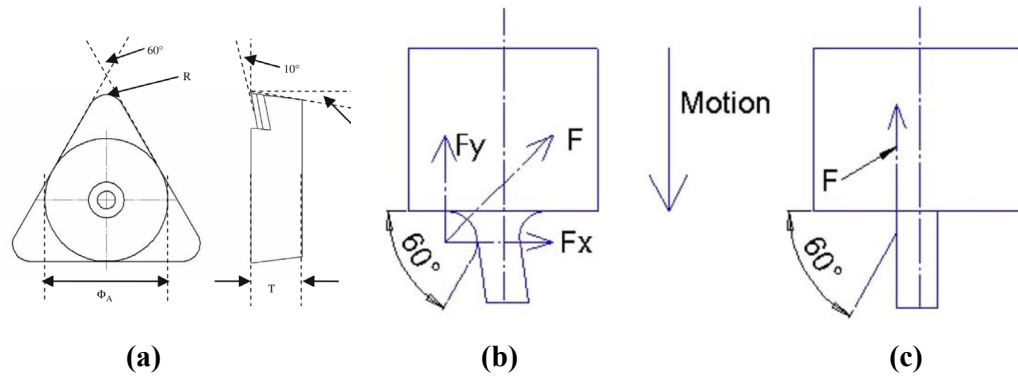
(a) Tool geometry of a commercially available PCD insert for finishing light cut, (b) turning with commercial tool, (c) turning with on-machine fabricated sharp tool.
